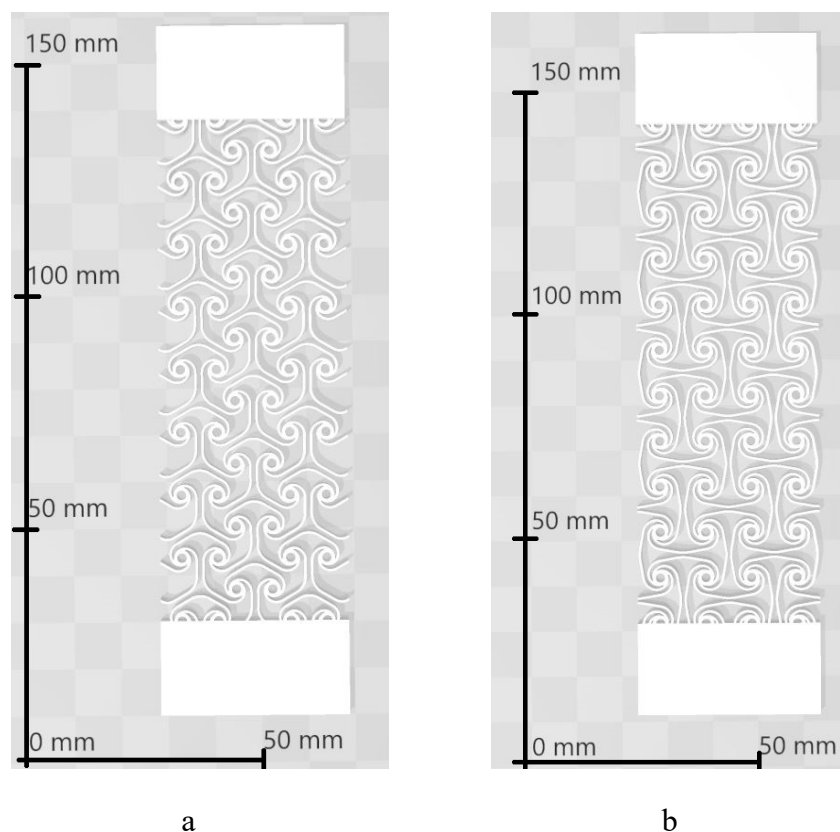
Tensile specimen examples: a) hexagonal pattern specimens b) square pattern specimens.
